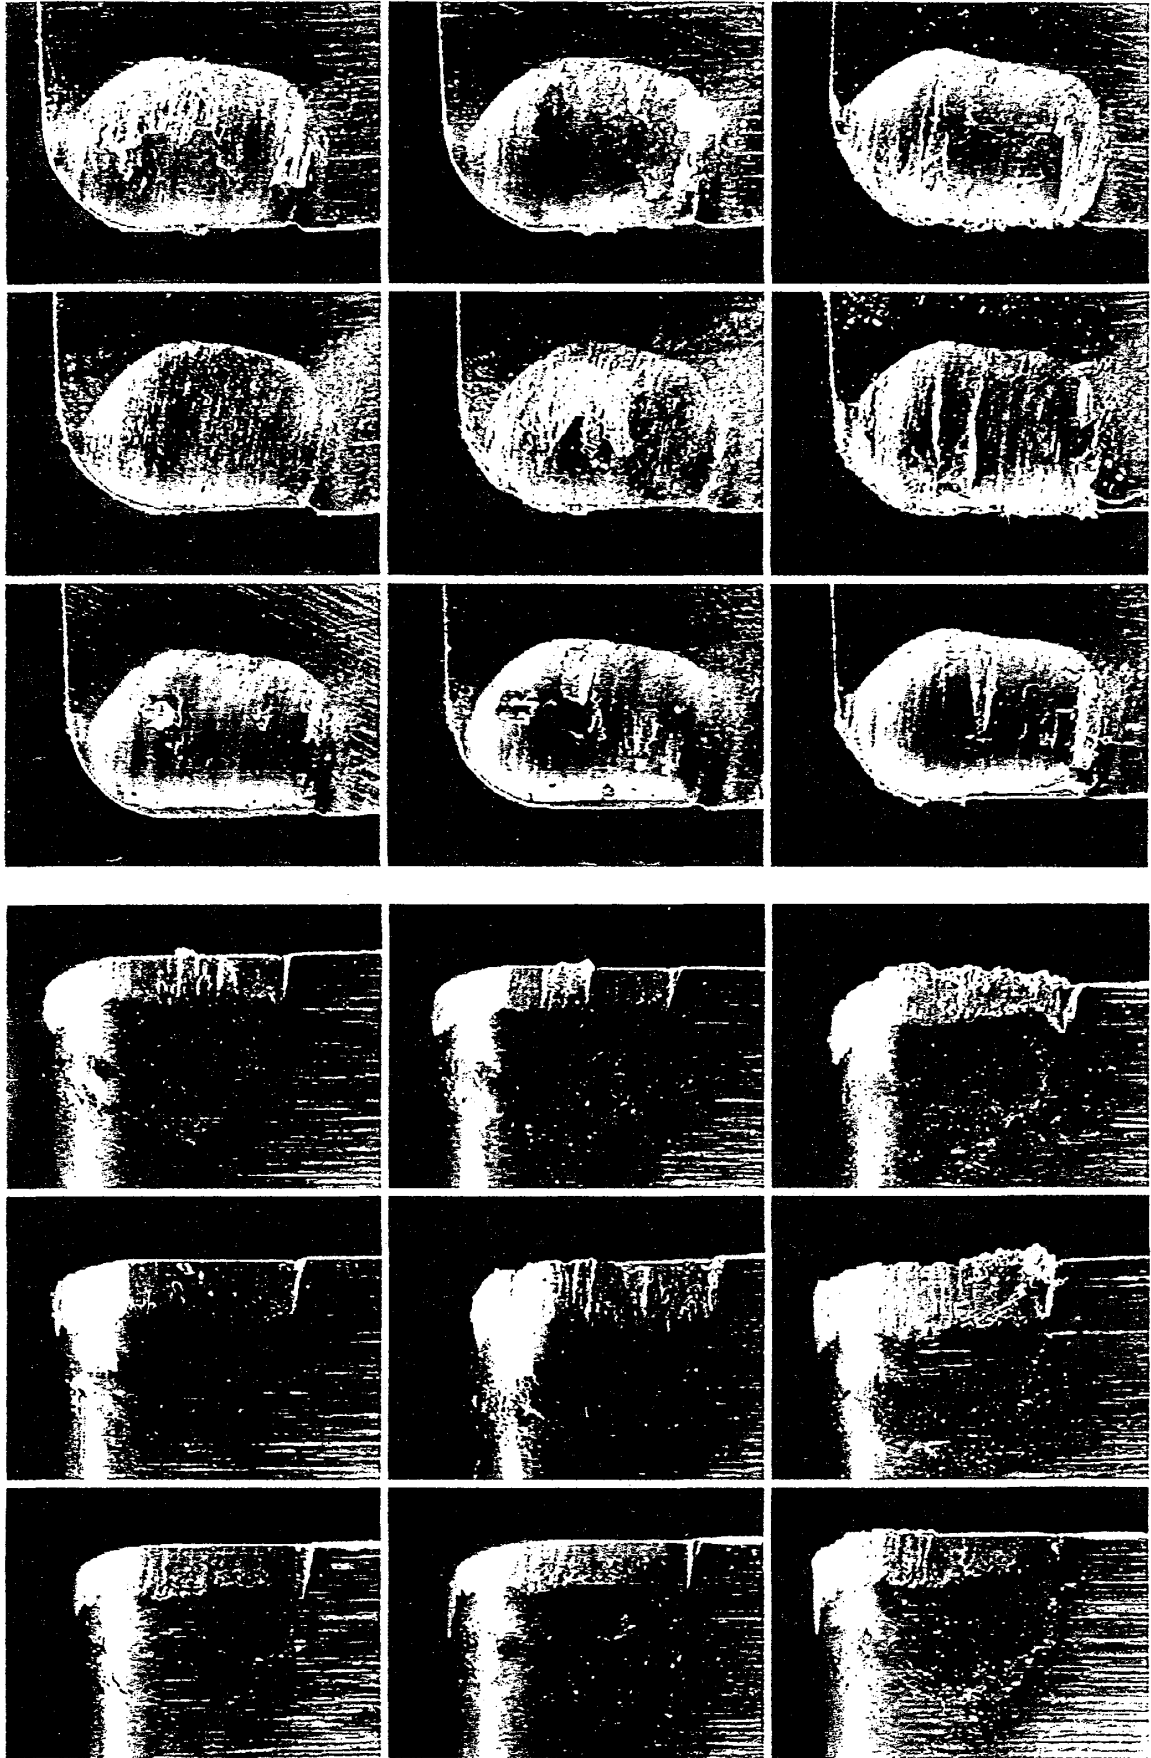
Appearance of cutting edge without treatment after 30 minutes cutting
